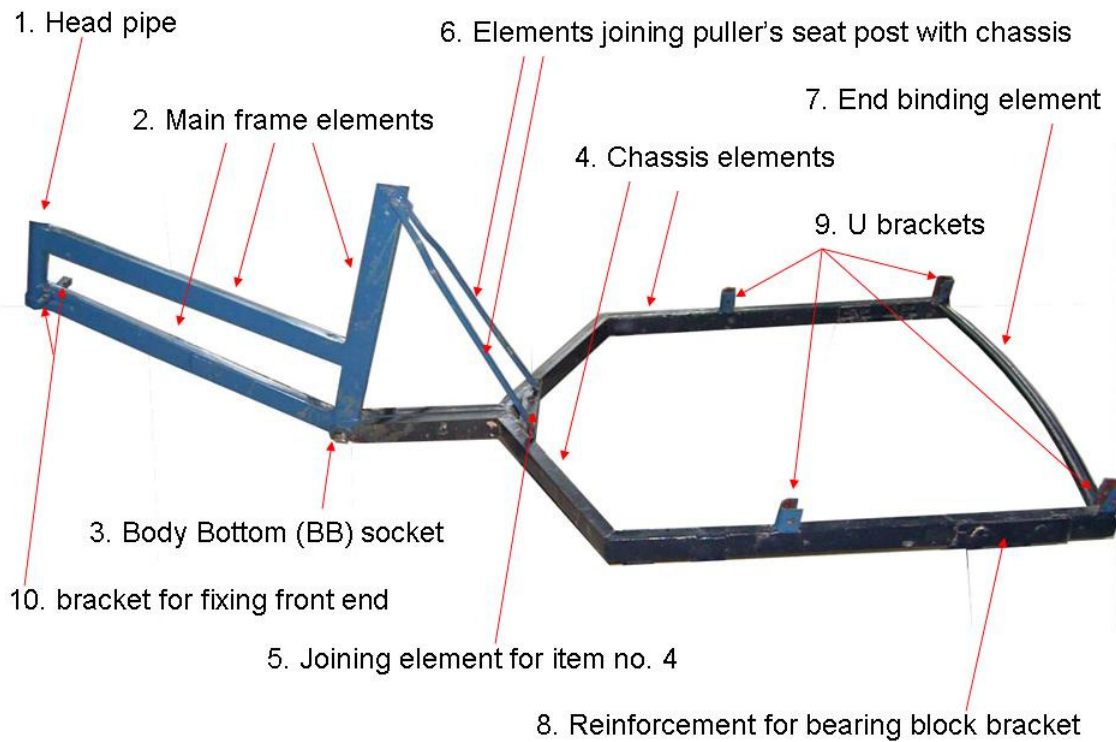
Integrated mainframe and chassis for Dipbahan
